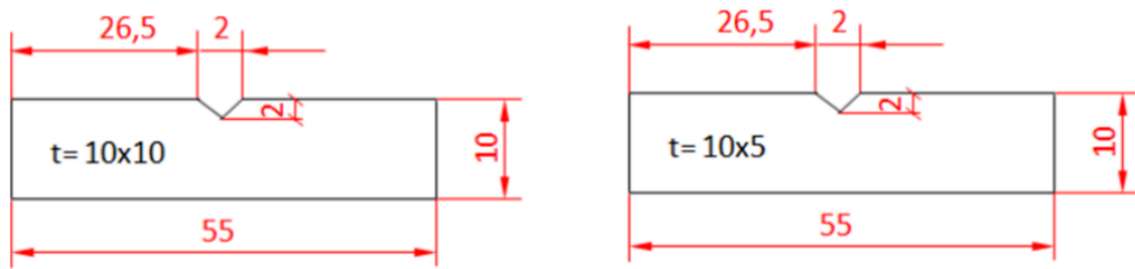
Dimensions of the V-notched Charpy impact test specimens for 20-mm (left) and 8-mm (right) workpieces.
